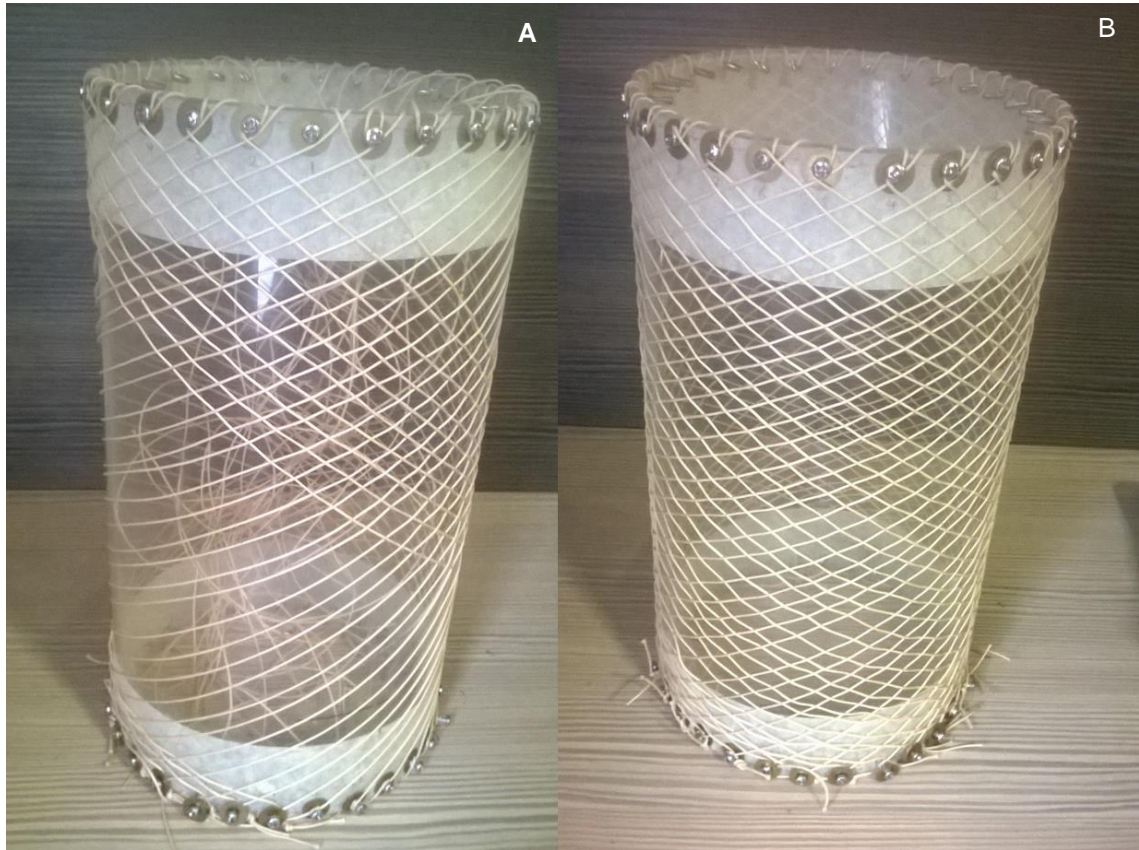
Partially complete thin wax cotton prototype (A) and completed prototype pre-removal (B)
